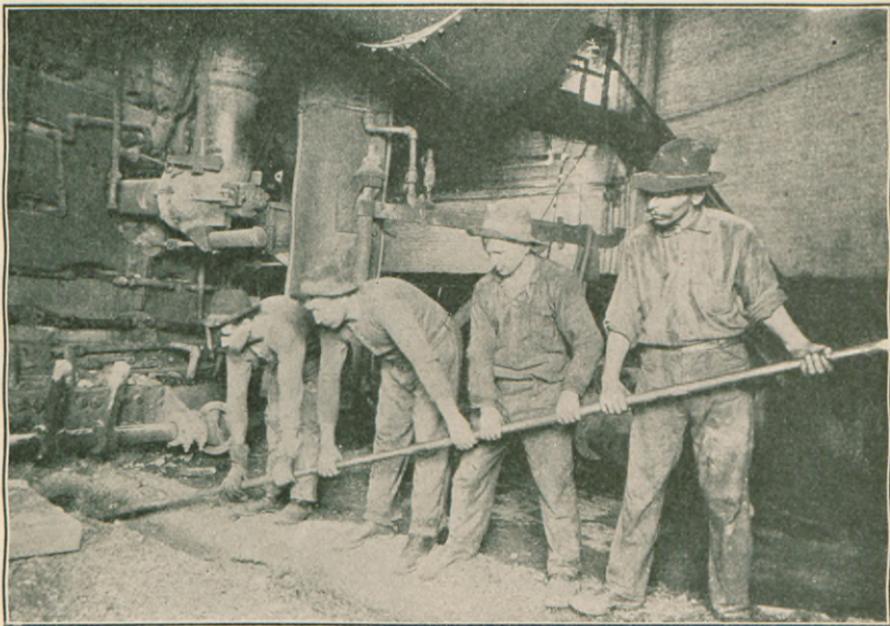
Unsafe method of drilling a tapping hole. Men standing over open trough on planks, no shield used at tapping hole, men are wearing loose baggy clothing.
